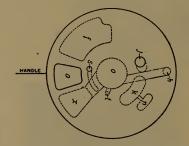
Rotary Valve H-6 Automatic Brake Valve.
